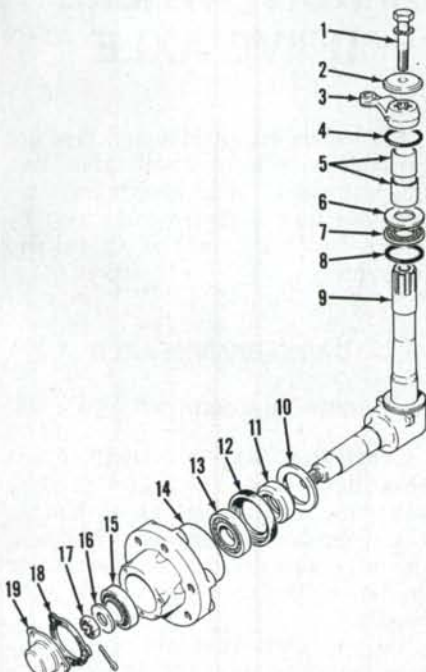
Exploded view of typical front spindle assembly showing component parts and their relative positions.
